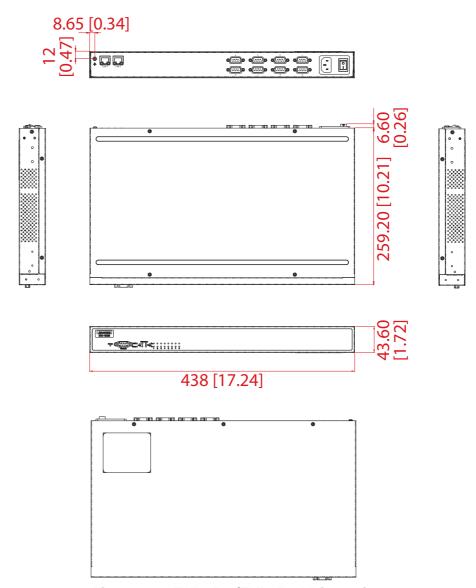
EKI-1528/EKI-1528I Dimensions
